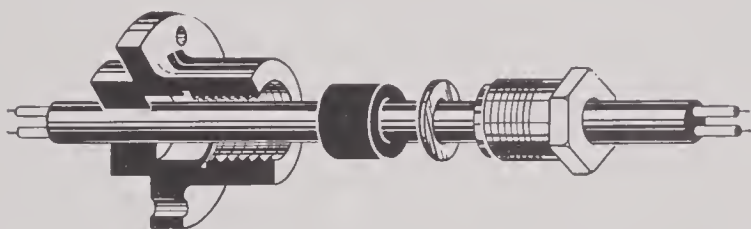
Cutaway view of the cable gland seal regularly employed at UCDWR. For standard dimensions, see Figure 72.
